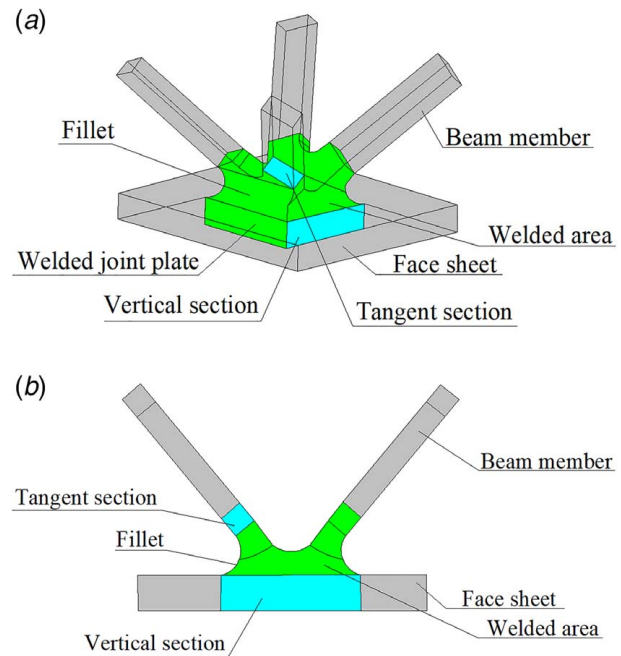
Components of a pyramidal truss unit of the solid element model of the PTSP in this work, including a part of a face sheet, four beam members, and four fillets at a welded joint: (a) 3D view and (b) the right side view
